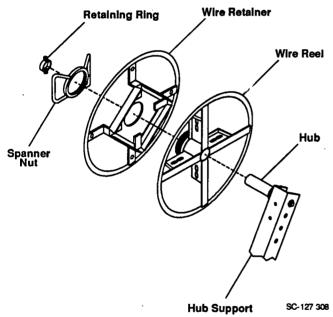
Optional Wire Reel And Reel-Type Wire installation
